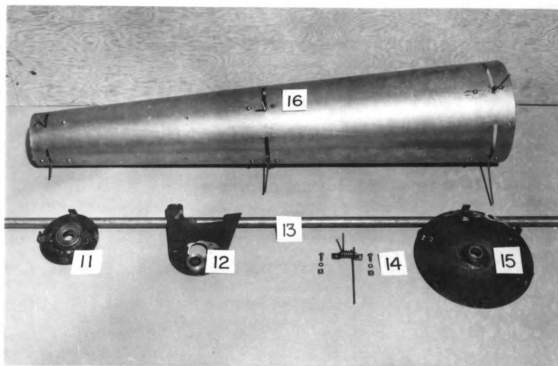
Disassembled view of the tapered roll pickup with retracting fingers.
